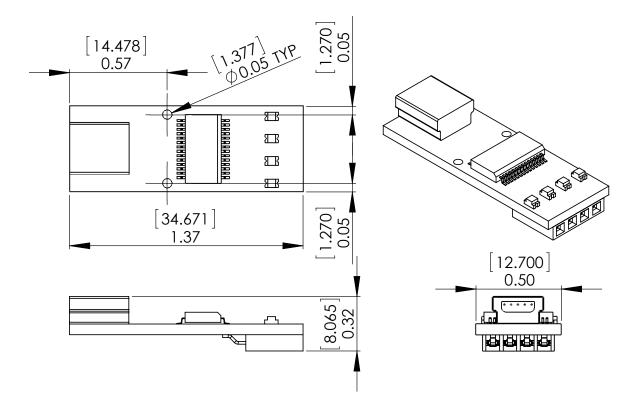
USB Serial Converter mechanical dimensions shown in inches [mm].
